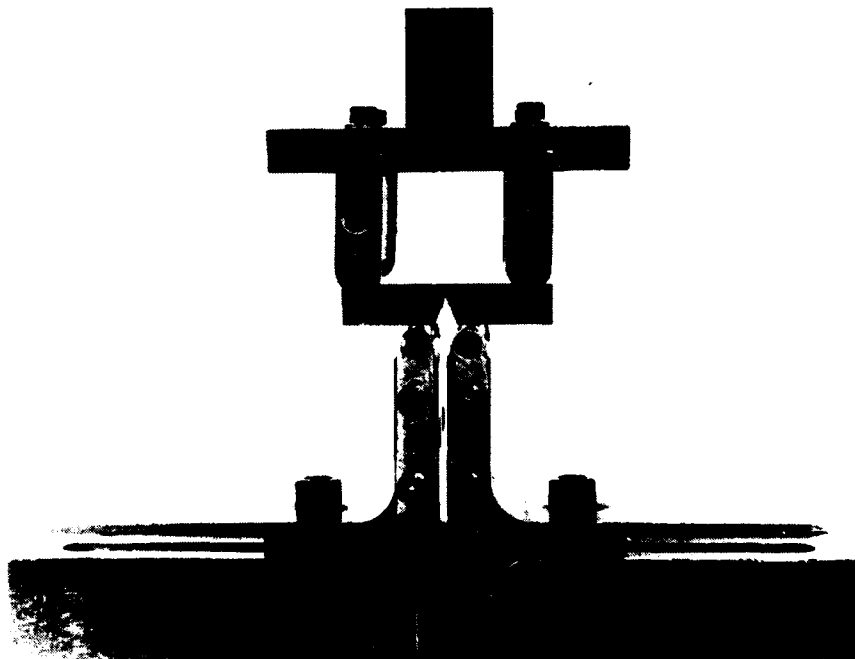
Notched Bend Bar Compression Specimen Geometry
